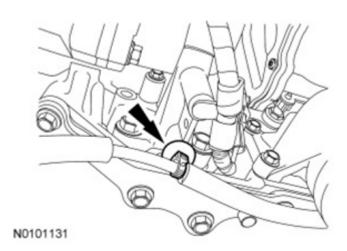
Locating Bolts And Transaxle Control Snow Shield Courtesy of FORD MOTOR CO.
